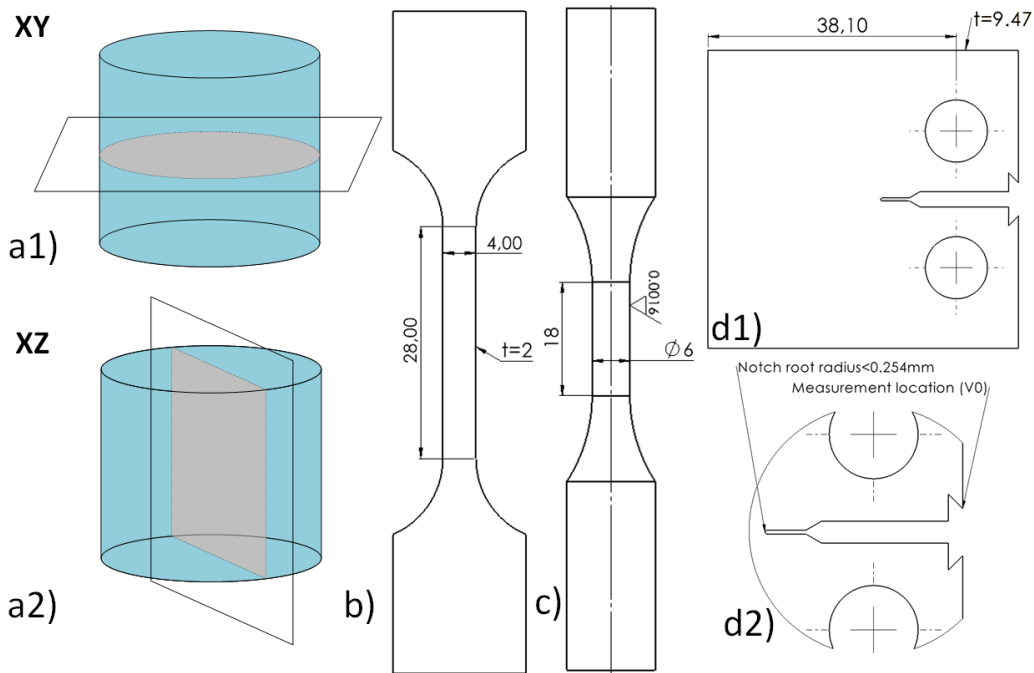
Specimens with their final dimensions: microstructure a1) XY-plane, a2) XZ-plane; b) uniaxial tensile testing; c) uniaxial fatigue testing; fatigue crack growth testing d1) overall view, d2) notch details (all dimensions in mm)
